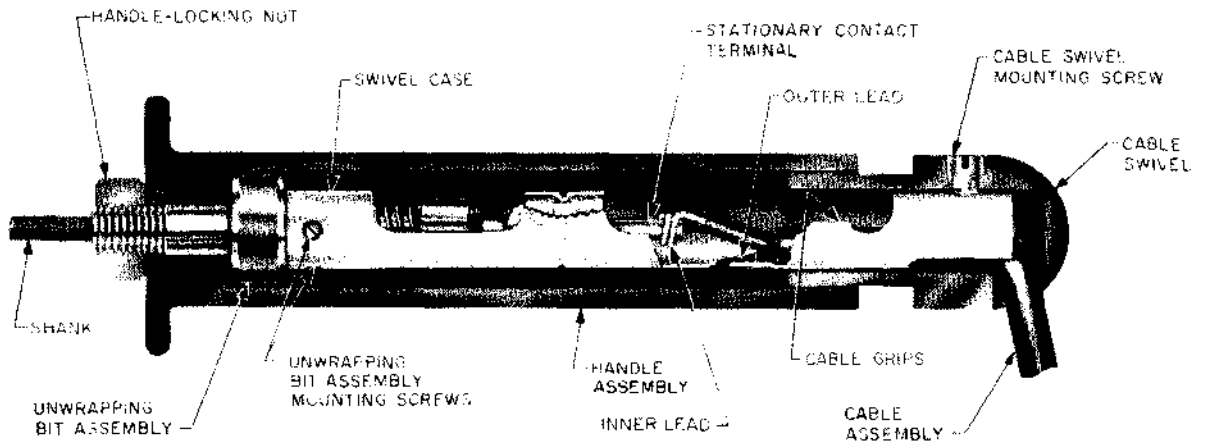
Cross Section of Handle Assembly for KS-16450 L1 Wire Unwrapping Tool
